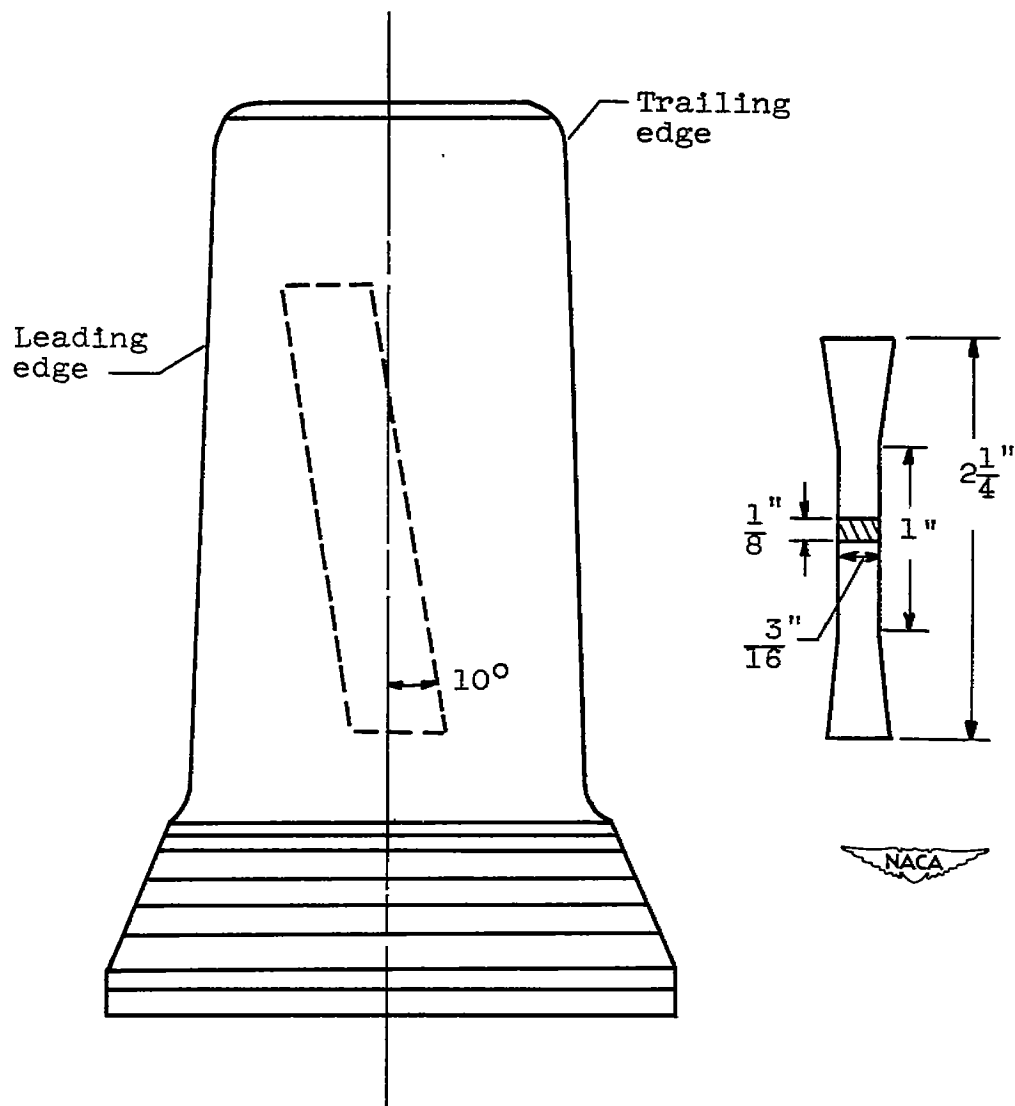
Blade stress-rupture specimen and zone from which it was machined.
